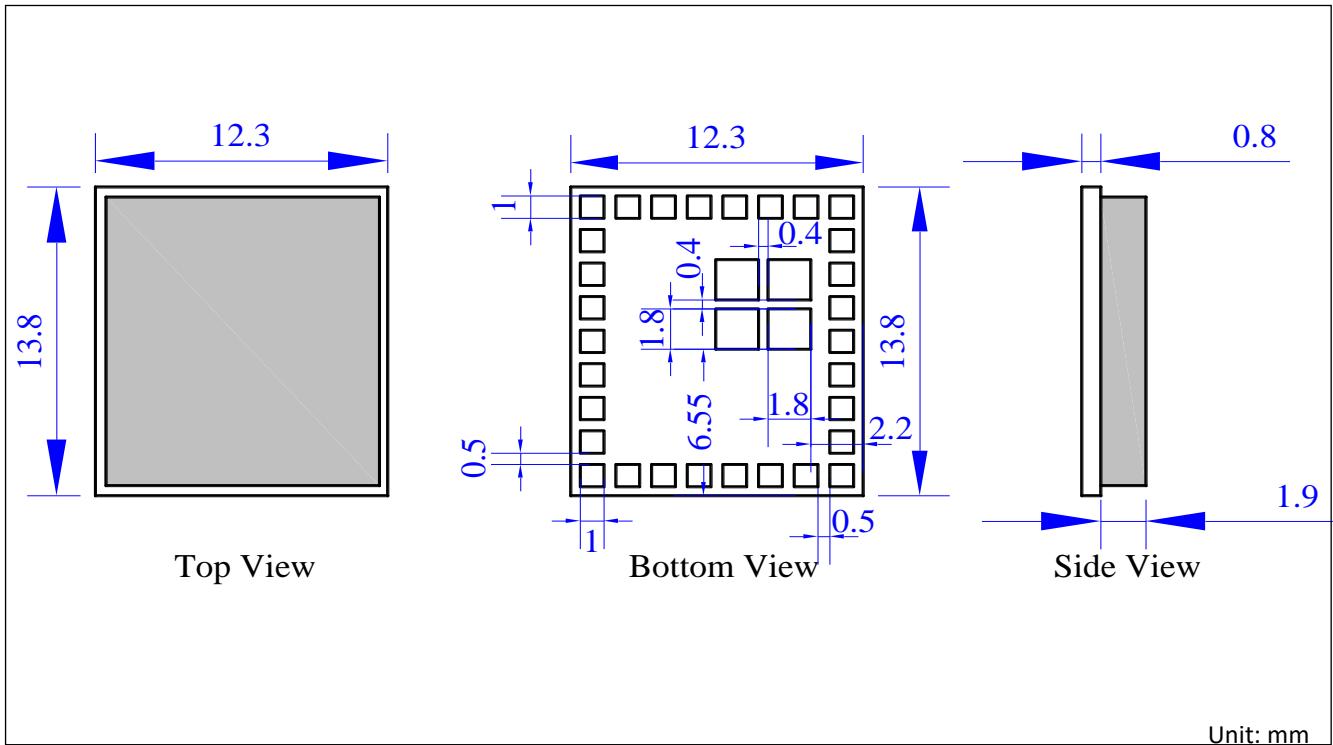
Mechanical Dimension of the BDE-RF7970N Module
